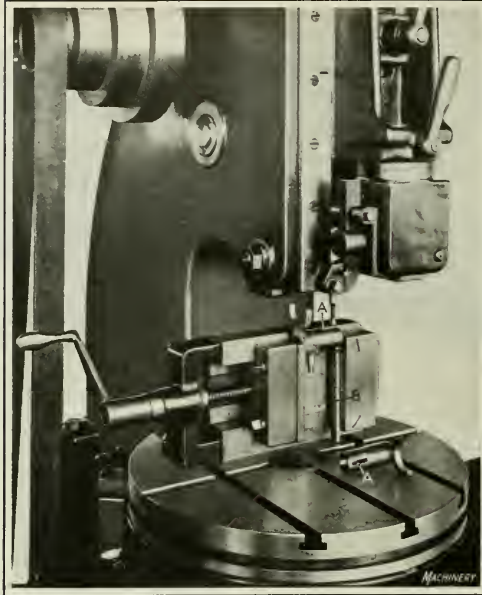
Use of a Vertical Shaper for squaring up the Ends of a Milled Slot
